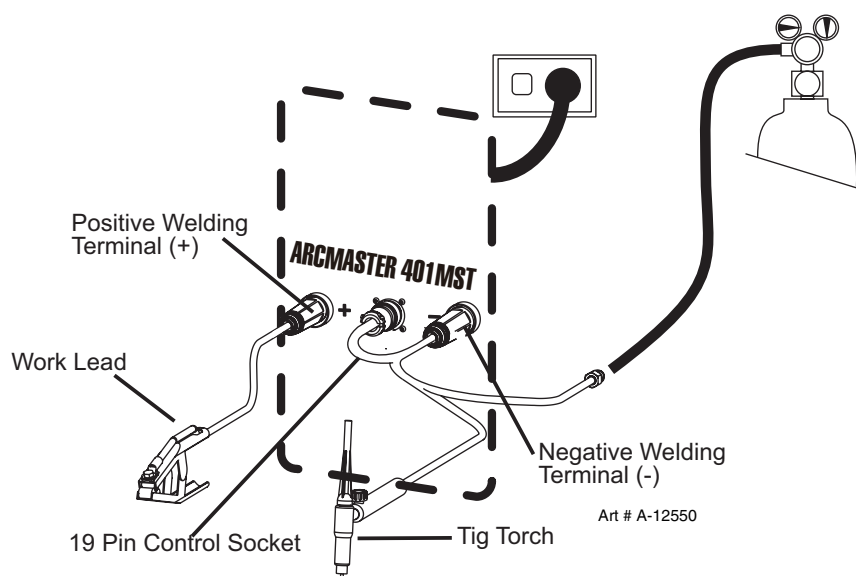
Setup for TIG (GTAW) Welding
